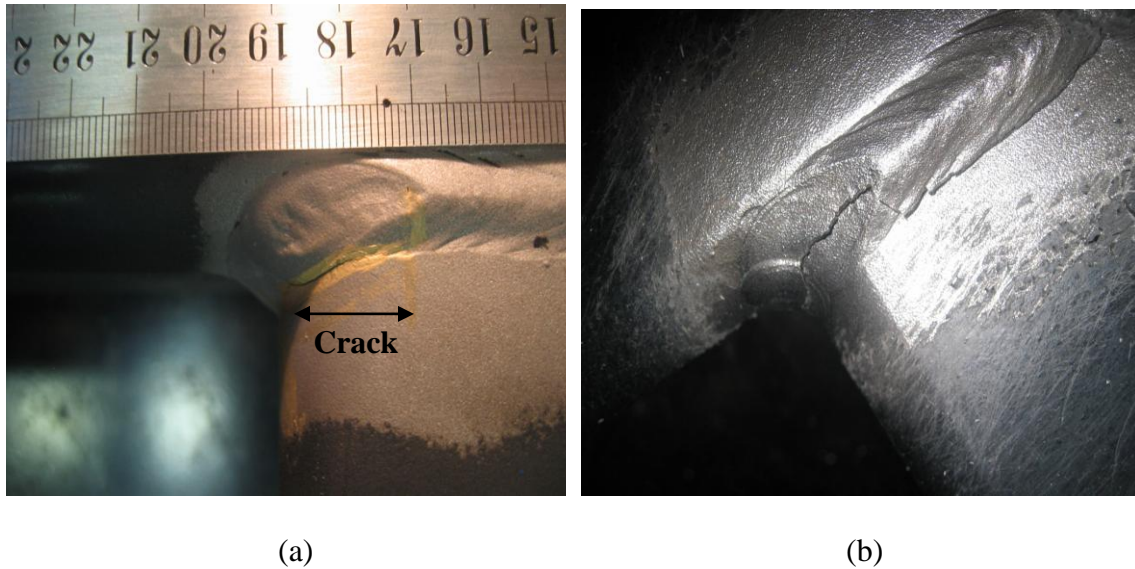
T-joint sample with fatigue crack initiated a) at the weld toe close to location 6. and b) at the weld itself close to location 6.
